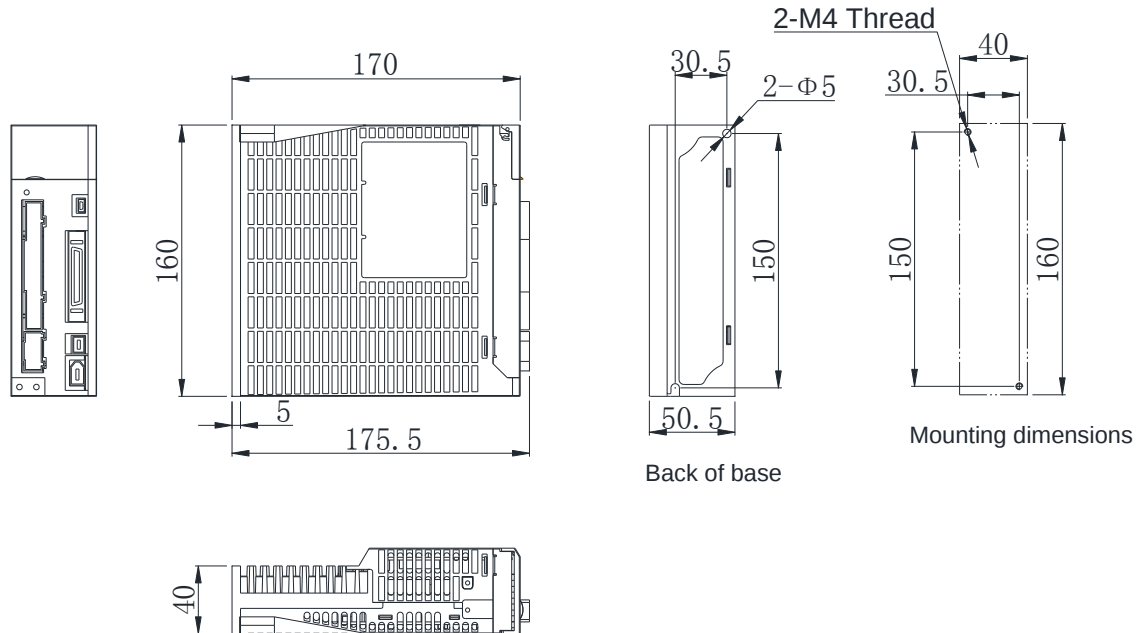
Outline dimensional drawing of WSDV-1R2 and WSDV-2R8
